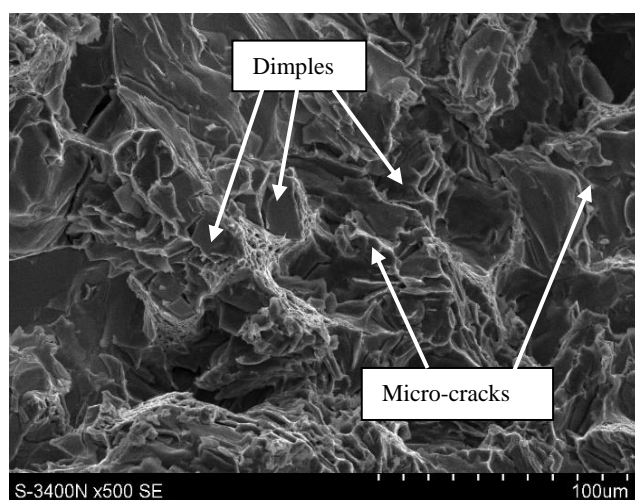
The fracture surface of the specimen under normal temperature tensile load
